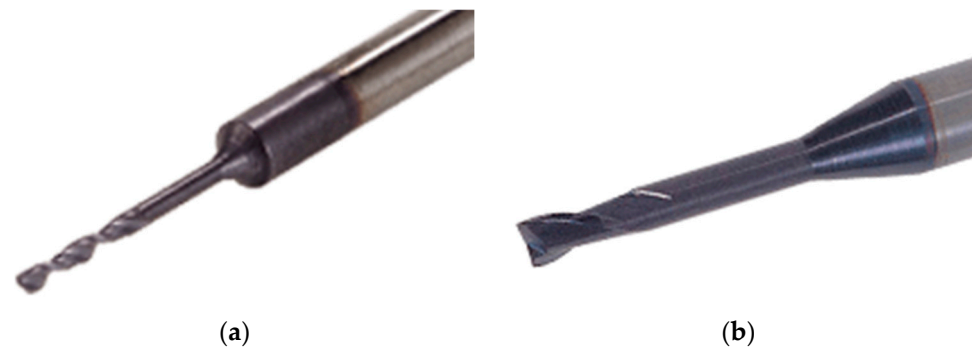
Cutting tools used in the mechanical drilling process: (a) drill SCD 008-003-030 AP4 and (b) milling cutter EC-A2 008-012/04C4M45.
